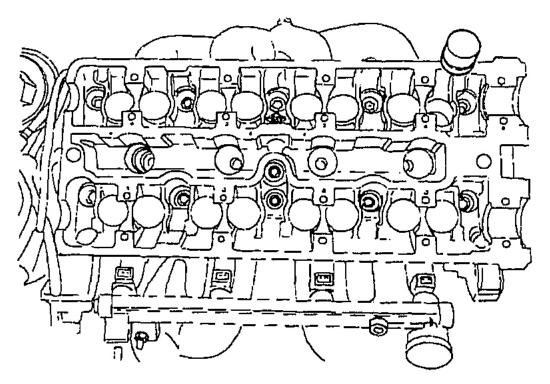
Compressing The Valve Springs Courtesy of SUZUKI OF AMERICA CORP.
